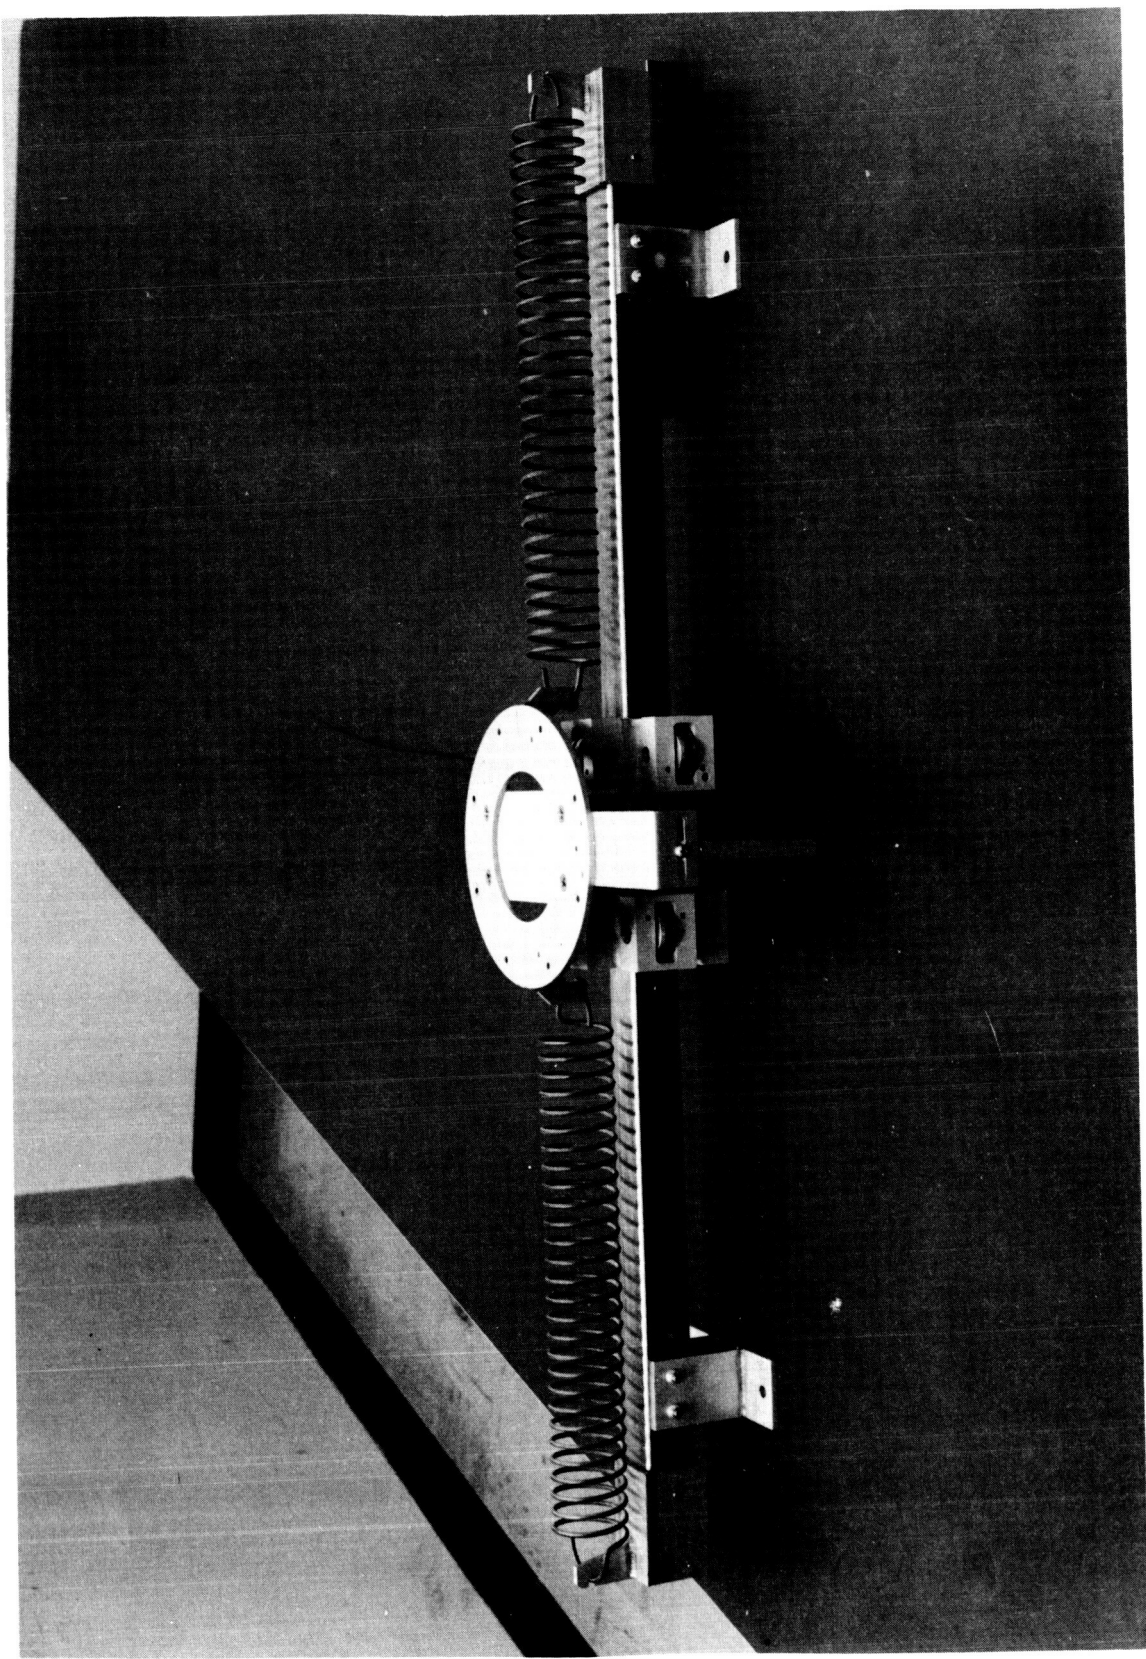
LMSC Multiple Conventional Ball Bearing Cluster Carriage Assembly
